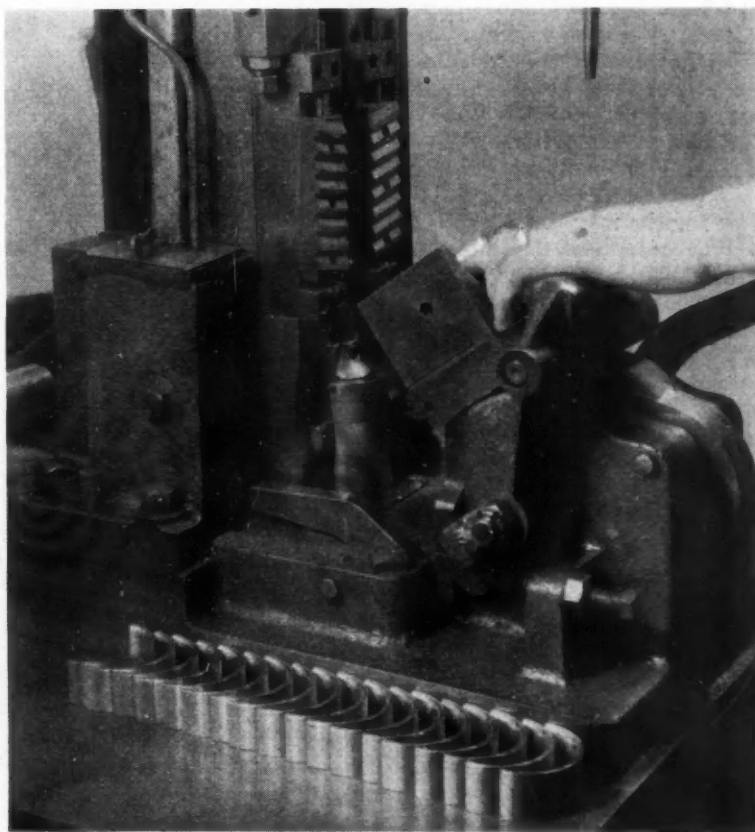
This special vertical broaching press is used by Bohn Aluminum for finishing the split faces. Note the expanding plug for seating the shell in the fixture block
